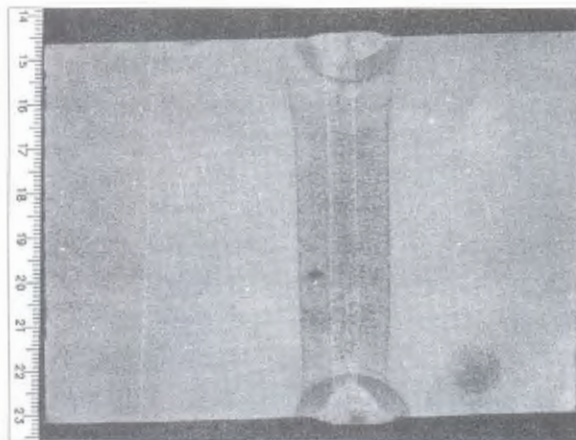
Macrosection of welded joint of armoured steel of 80 mm thickness, made by EBW
